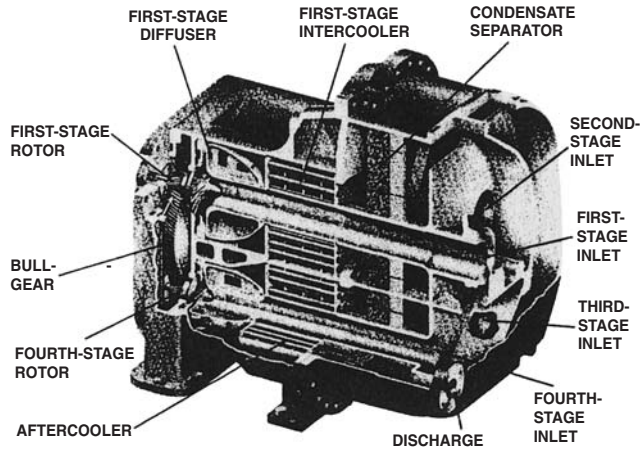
Cutaway of bullgear centrifugal compressor.
